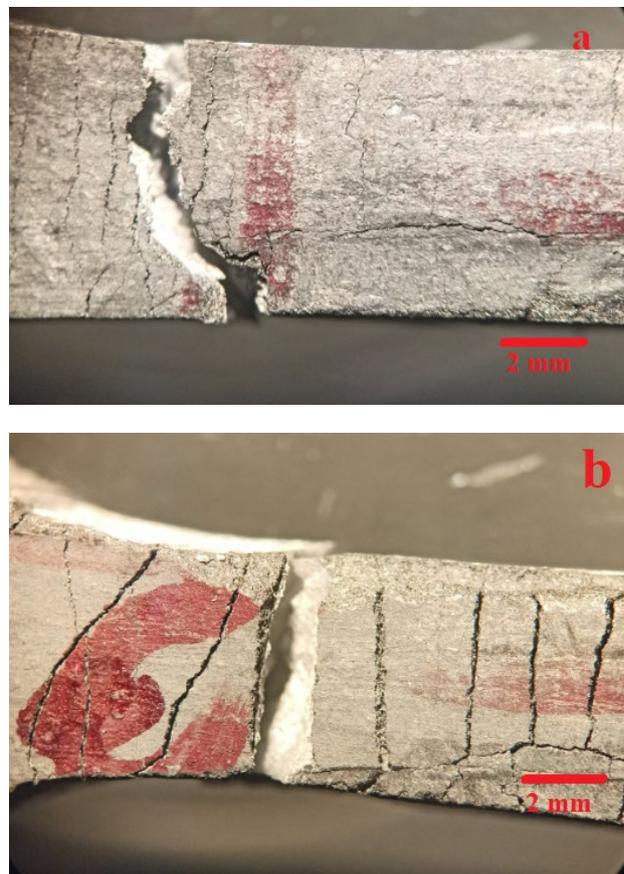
Cracks formed perpendicular to the tensile direction in the composite layer a) 1 mm, b) 2 mm.
